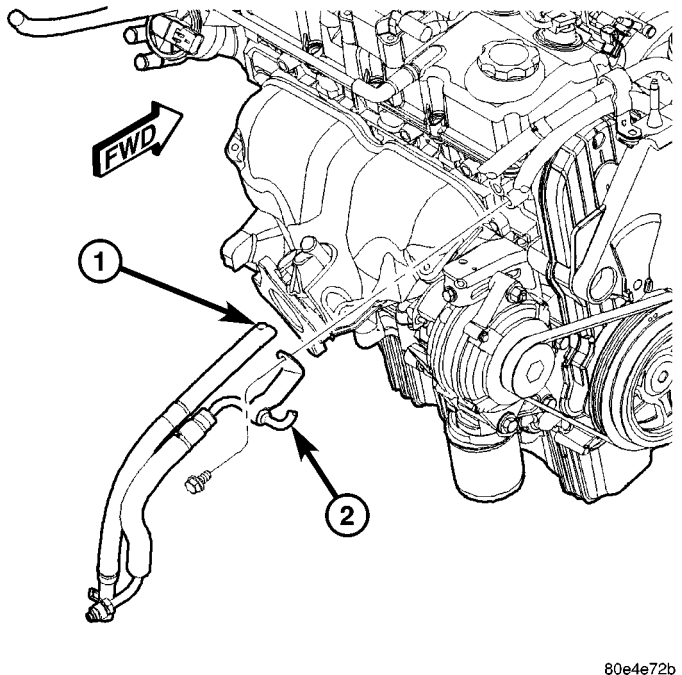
RHD Pressure Hose At Engine - 2.0L Engine
